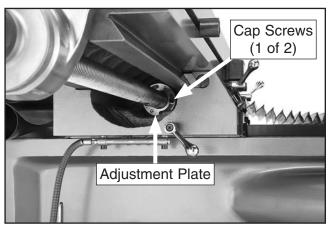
X-axis leadscrew nut cap screws and adjustment plate (viewed from underneath left side of table).
